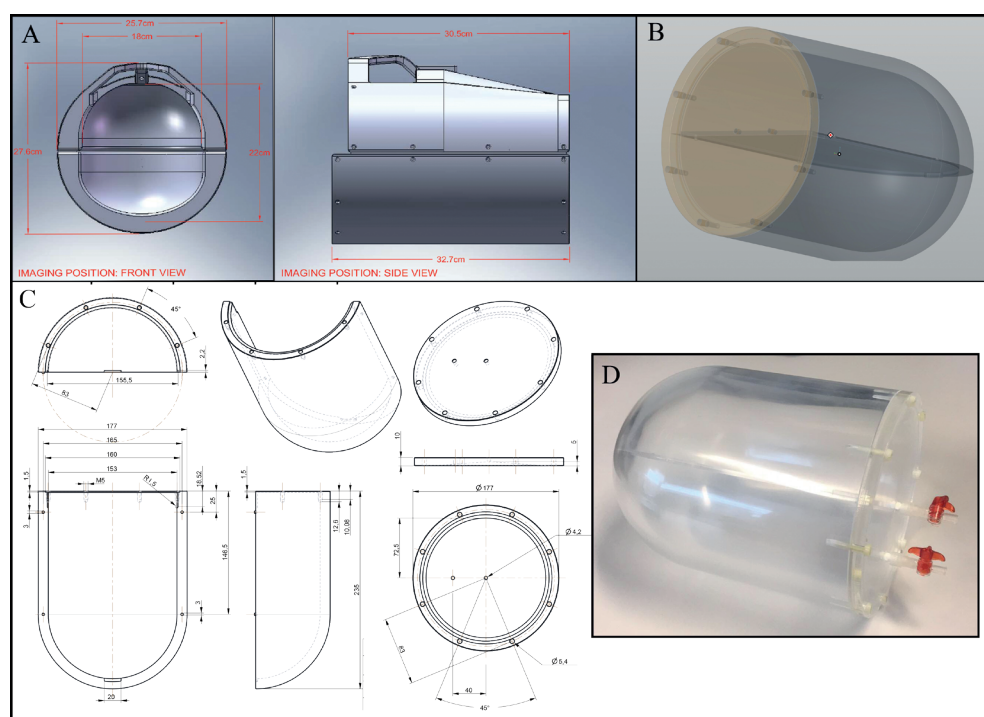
A) Geometric dimensioning and tolerancing of the container; 245mm full-length, 177mm width. B) 3D rendering using Creo Parametric 3D Modeling Software 3.0 (Parametric Technology Corporation, PTC, USA). C) Completed container including the lid, screws [yellow], sealing ring, and values [red].
